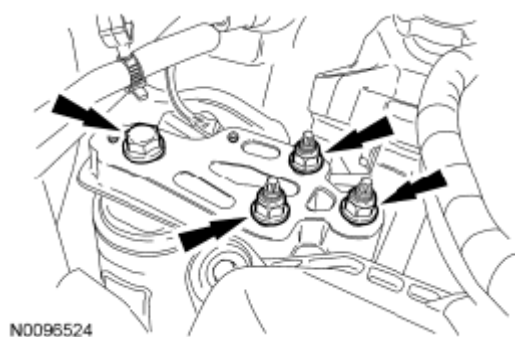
Locating Engine Mount Bracket With Bolt & Nuts
